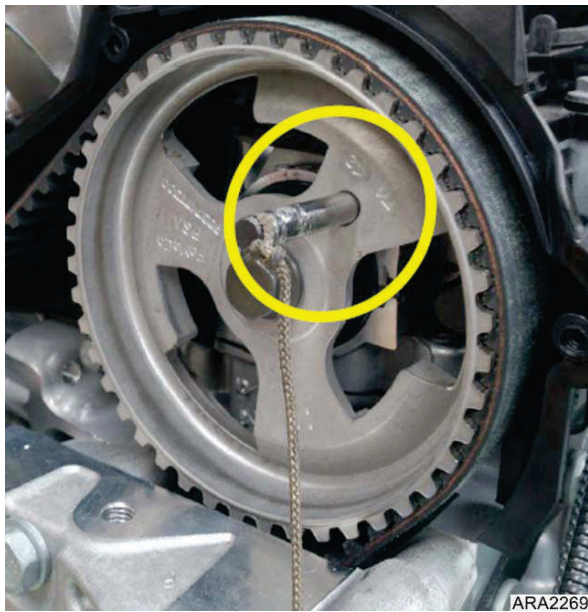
Align Hole in Camshaft Pulley with Corresponding Hole in Cylinder Head
